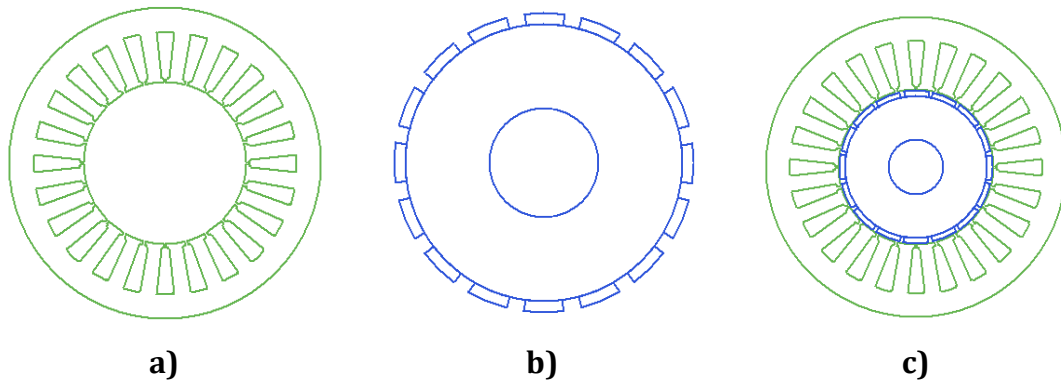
Geometric drawings used a) stator design, b) rotor design, c) overall design.
